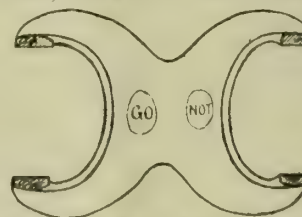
DOUBLE-ENDED FIXED EXTERNAL (CALIPER) GAUGE
